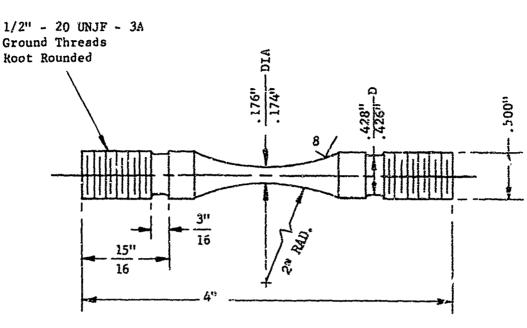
Dimensions of Tensile and Fracture Toughness Specimens
